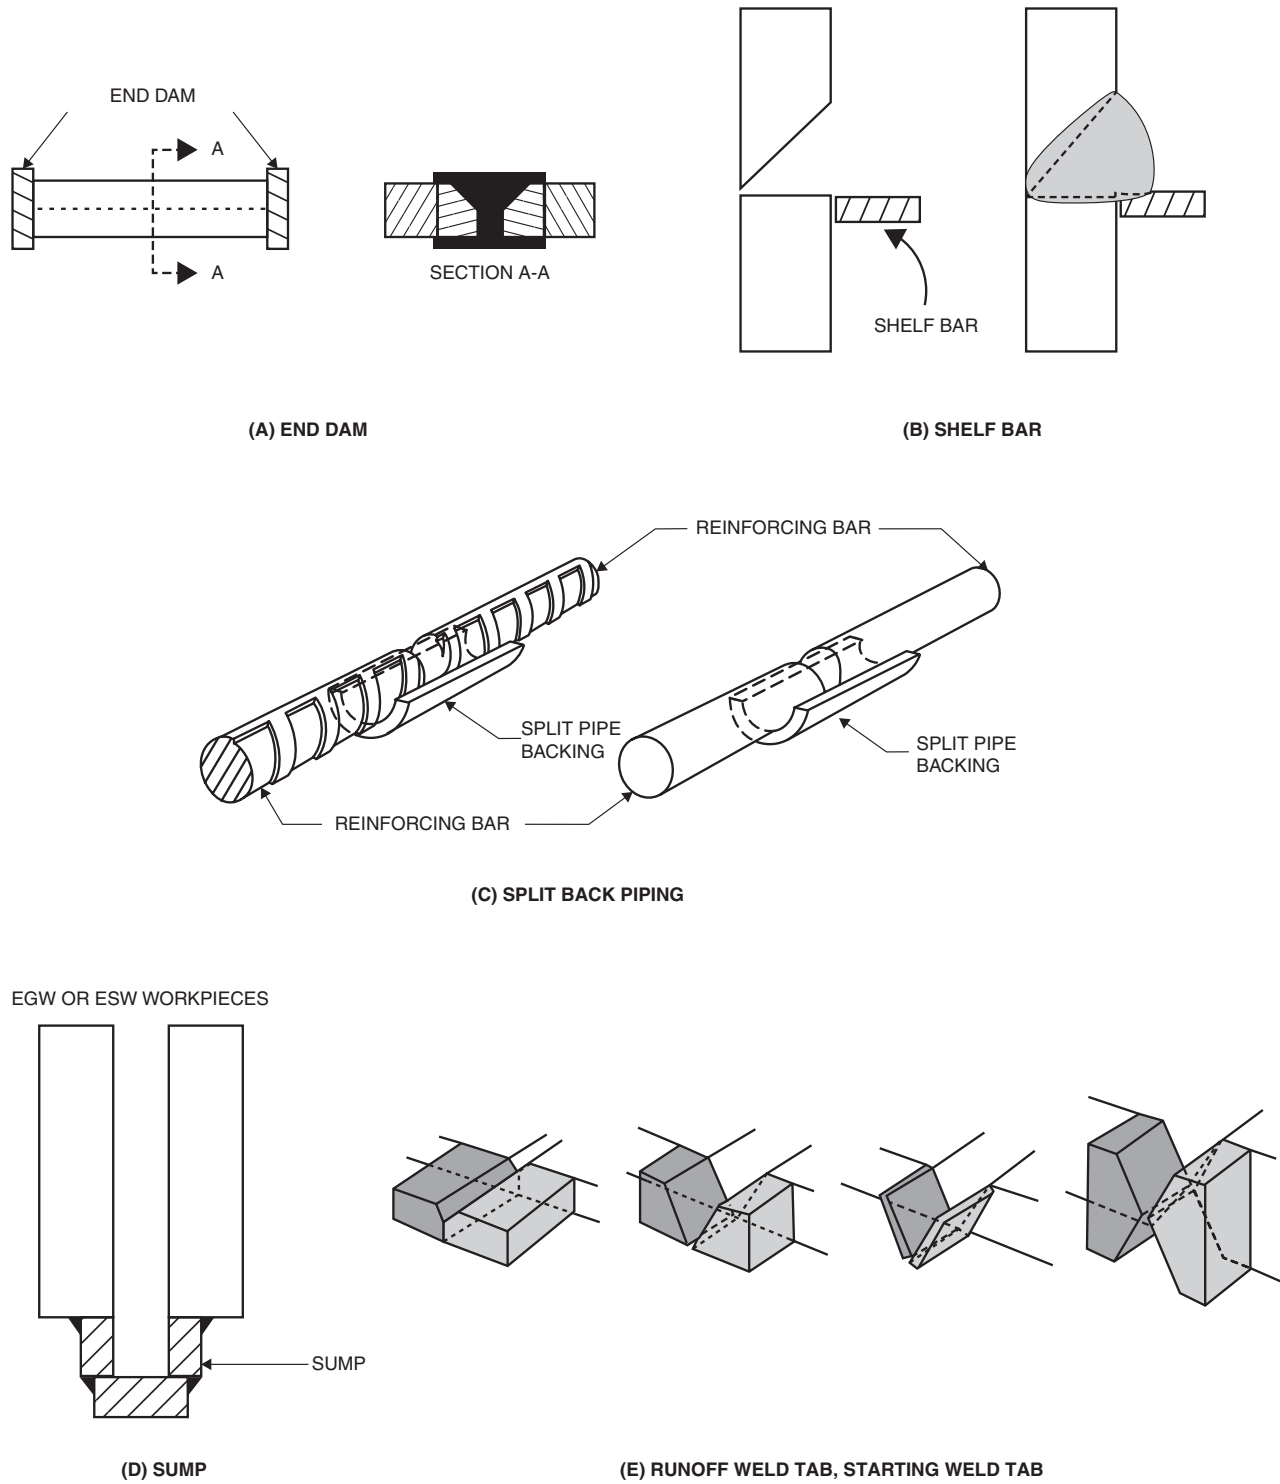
End Dam, Shelf, Split Pipe Backing, Sump, Starting Weld Tab, and Runoff Tab
